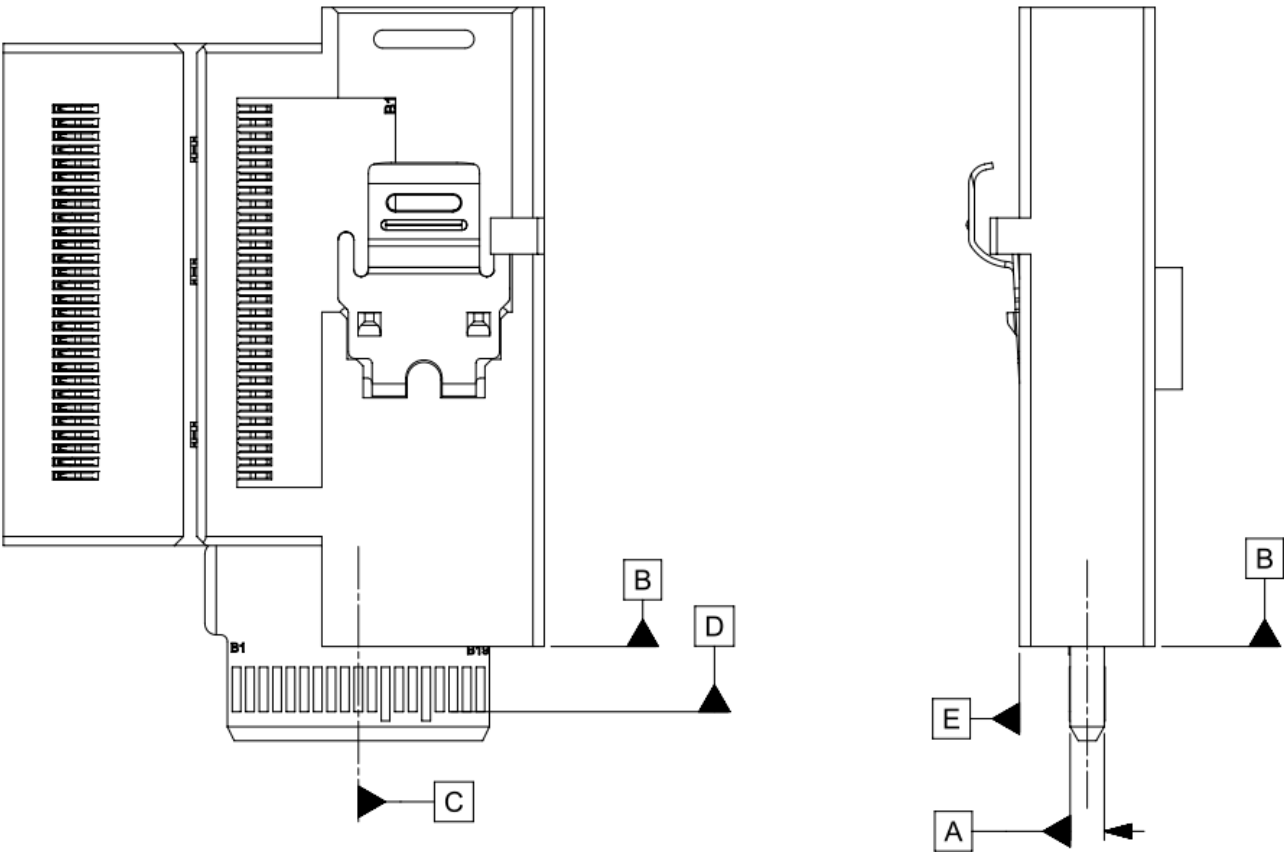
38-Pin Style B Connector Plug Datum Definitions
